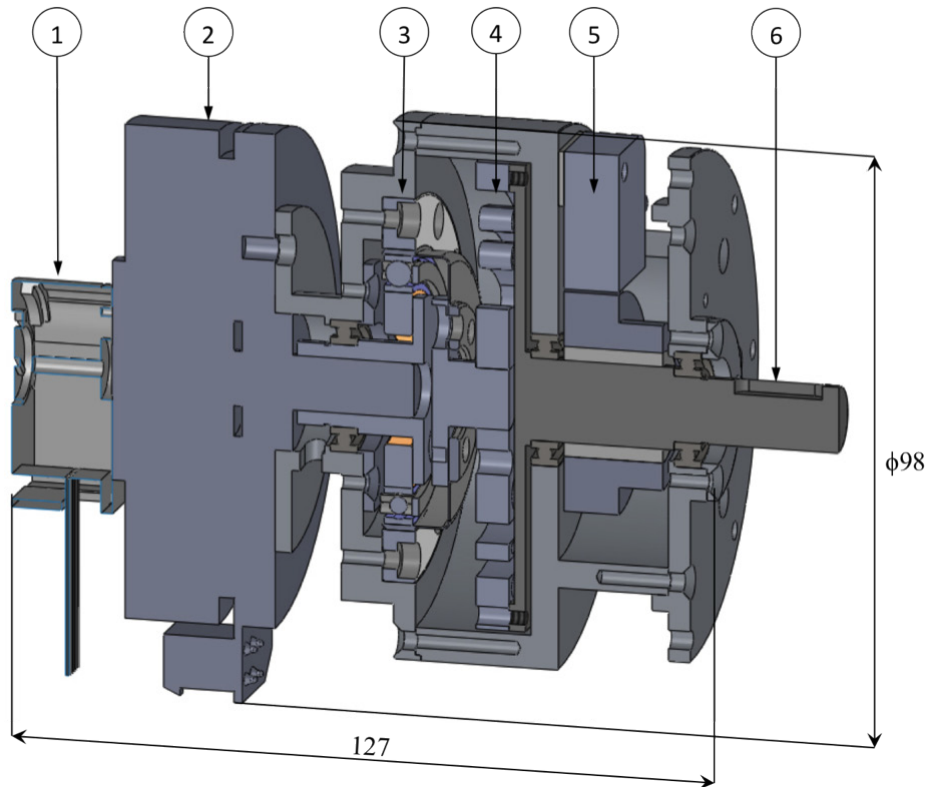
Cross section of the second version of SEA 90W. 1: optical incremental encoder, 2: flat DC motor, 3: Harmonic Drive, 4: torsional spring, 5: magnetic incremental encoder, 6: output shaft. Dimensions: 98 mm (diameter) \times 127 mm (axial length).
